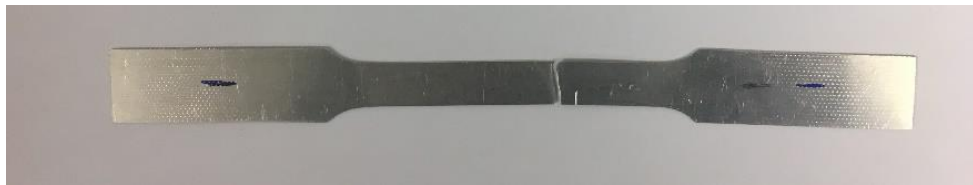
Failure mode in the aluminium coupons following tensile testing.
